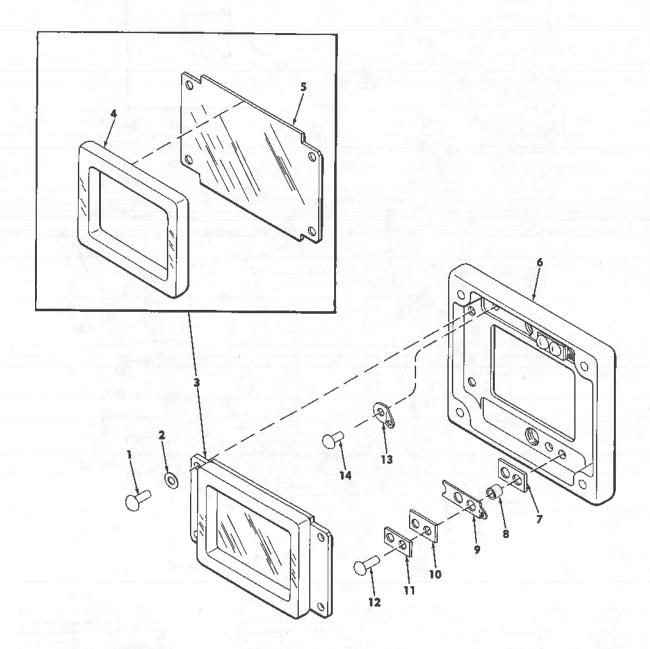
TRANSMITTER, POSITION, GUIDED MISSILE /9007946/-PARTIAL EXPLODED VIEW
